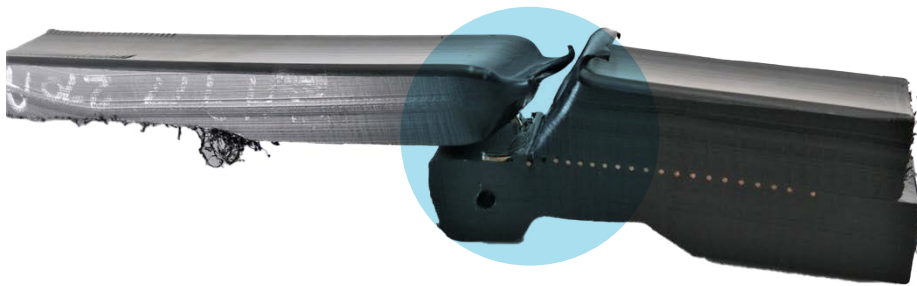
shows ductile fracture of the pipe wall has occurred. This is a Pass result.
